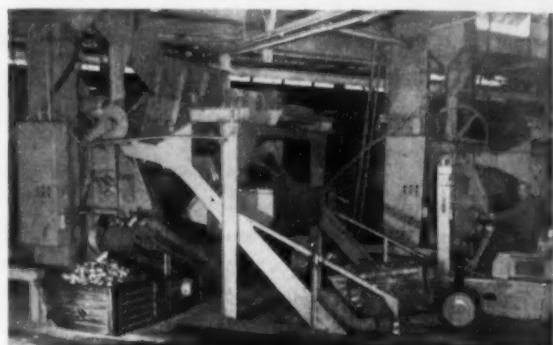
Mechanical conveyer belts discharge cleaned castings from the shot-blasting units into skips for speedy transfer to the snagging line.
